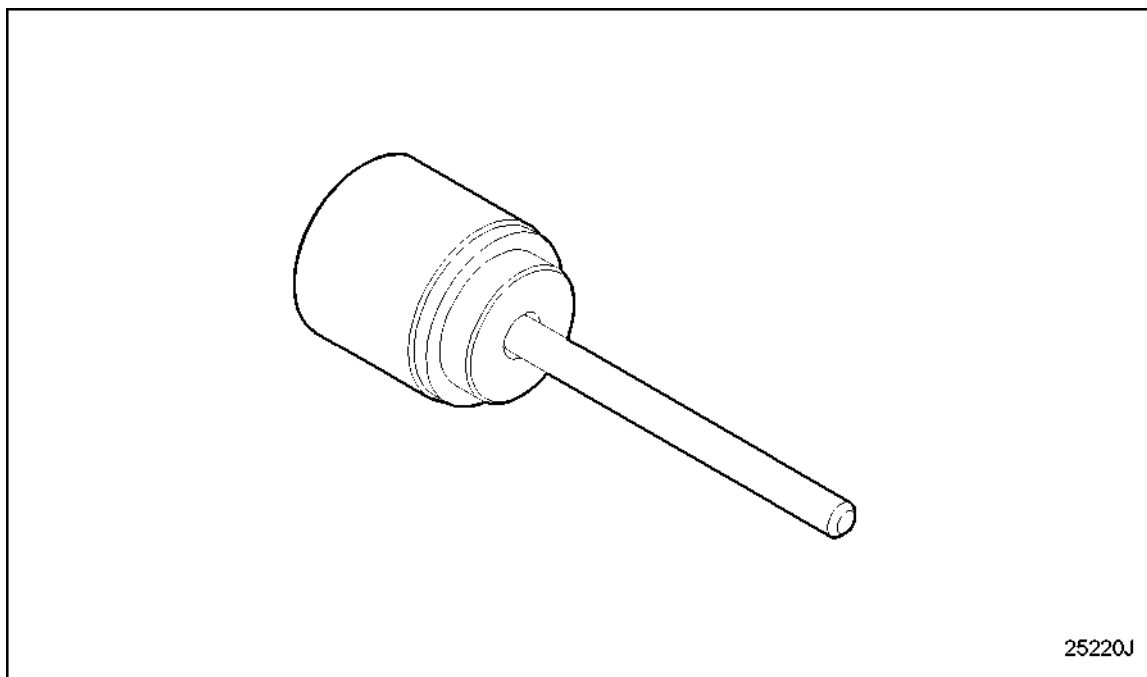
Valve Seat Installer, Exhaust,J 41578
